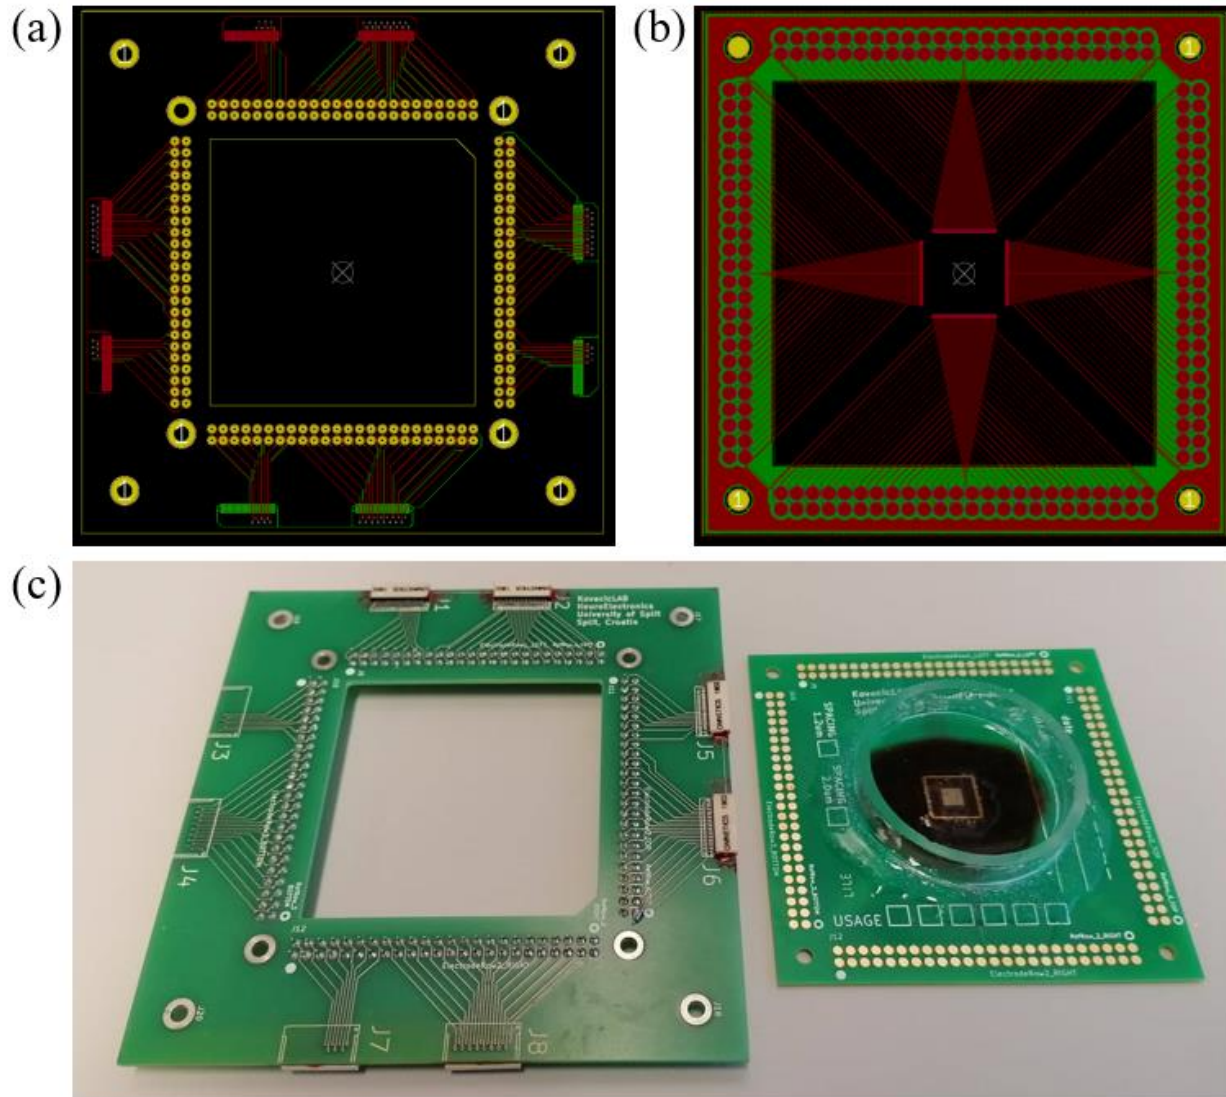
Two-level PCB architecture: (a) KiCad layout of the connector PCB (b) KiCad layout of the chip carrier PCB (c) Connector PCB (left) and chip carrier PCB (right) [83]
